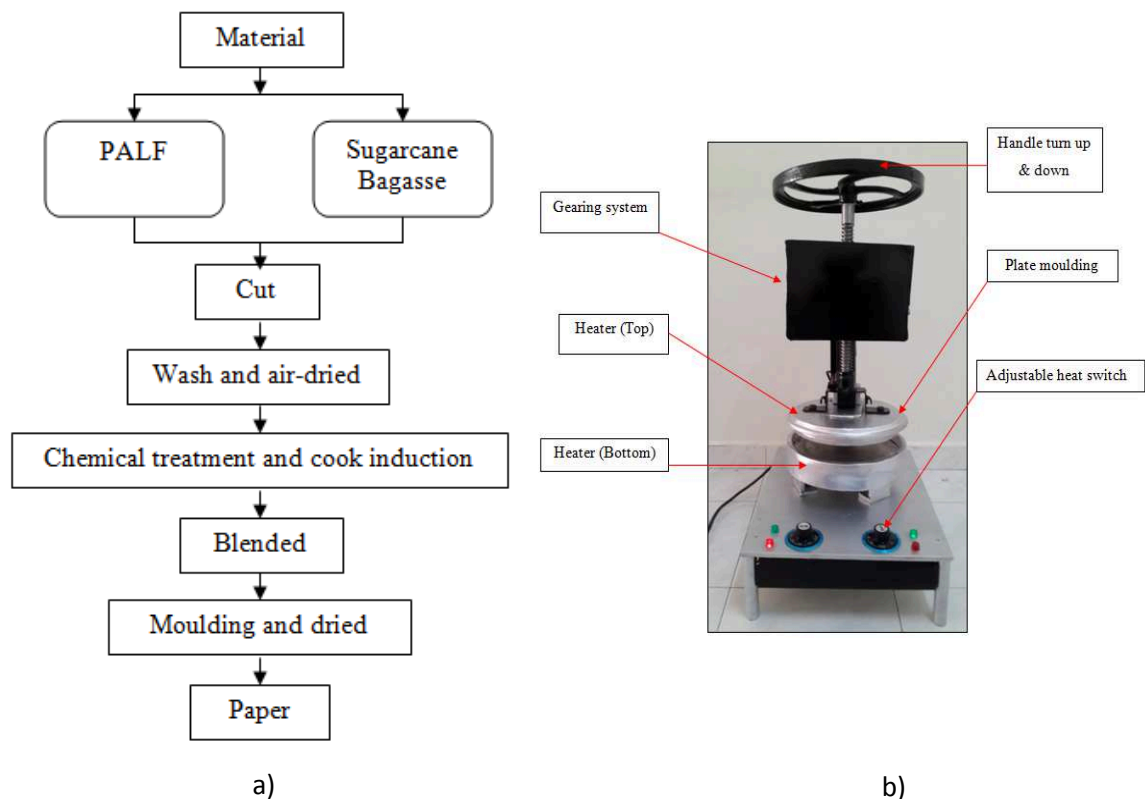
a)Schematic Specimen preparation b) Hot press machine for disposable plate producing
